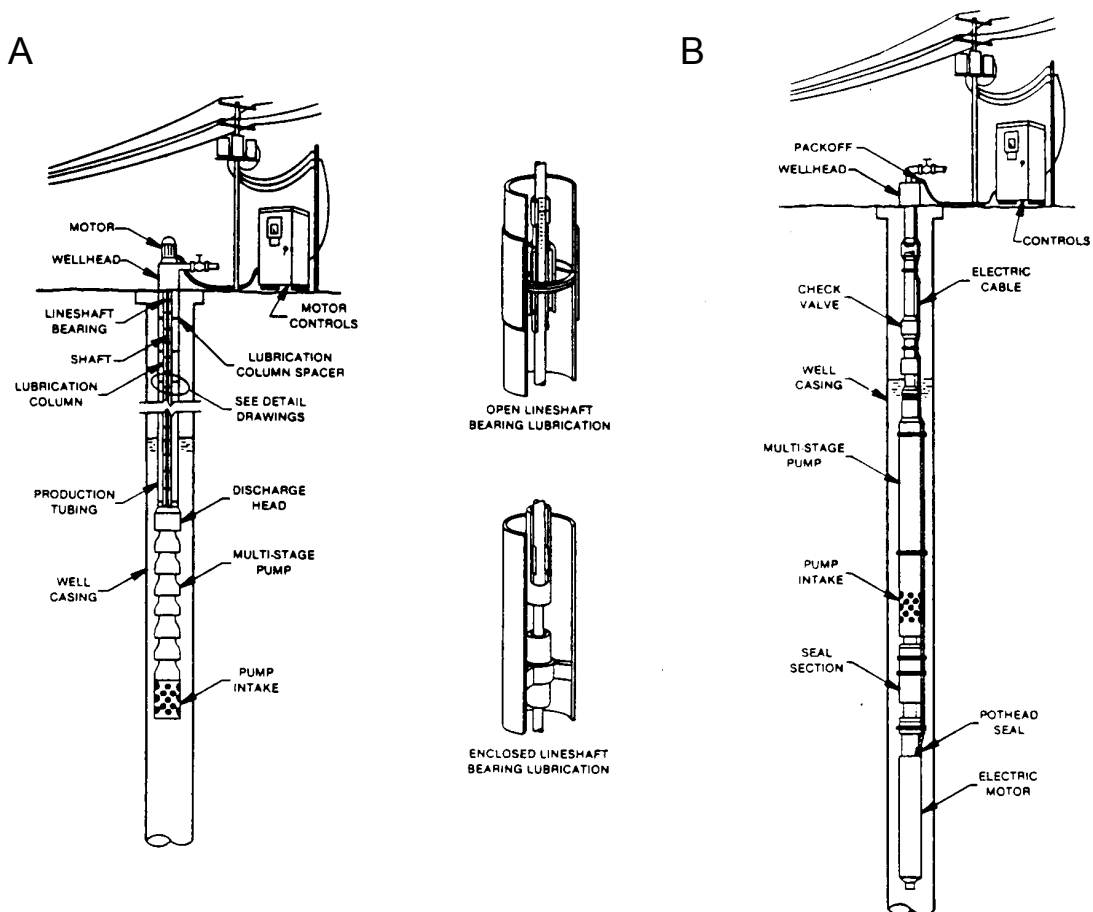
Downhole pumps (a) lineshaft pump details, and (b) submersible pump details
